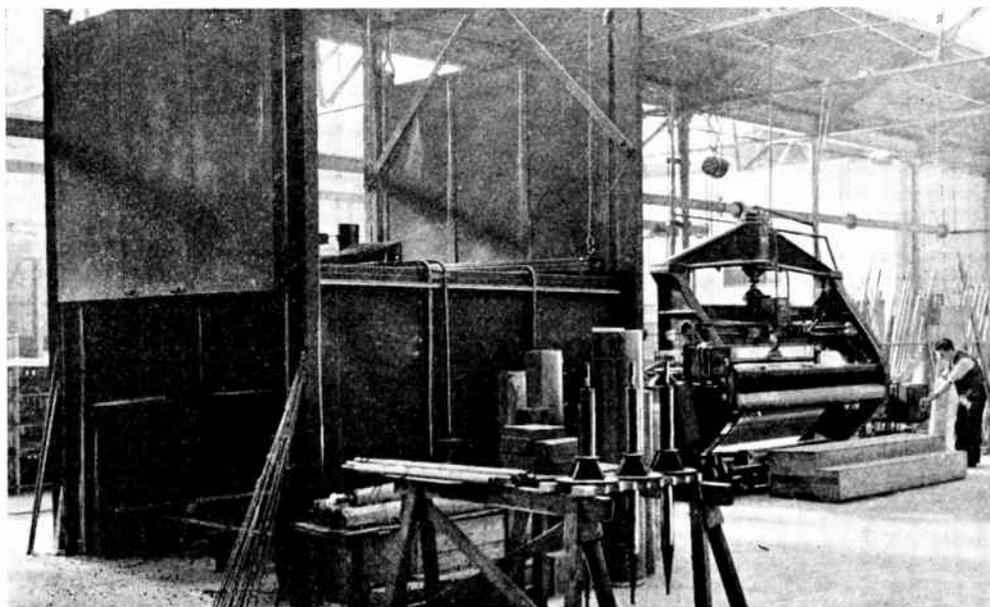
WINDING CONDENSER BUSHINGS FROM BAKELIZED PAPER.
